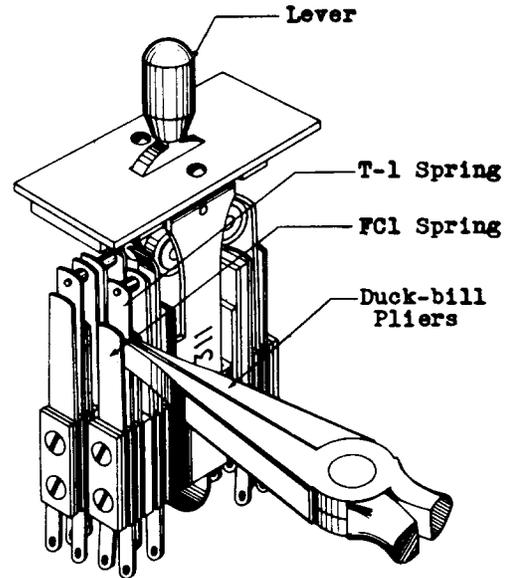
Method of Adjusting for Contact Separation on T-1 Spring
